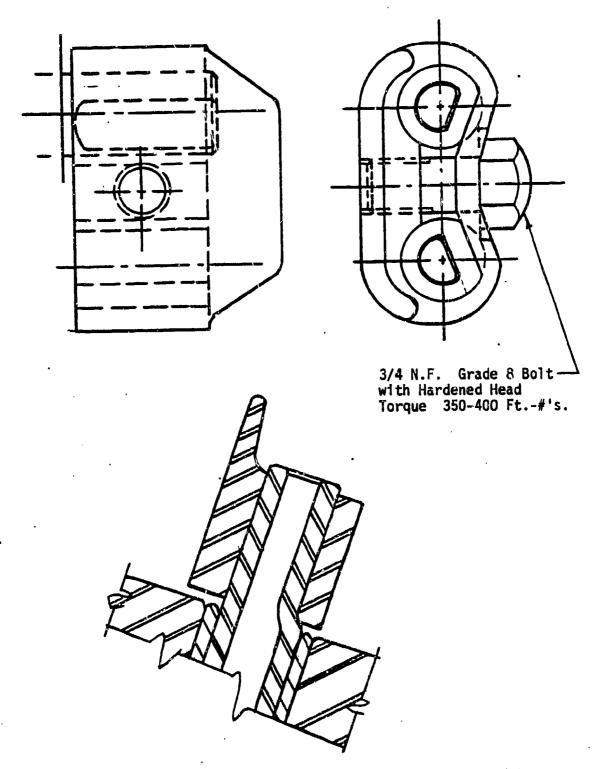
Forged clamp type end connector mounted on pins with flat stamped in place.
